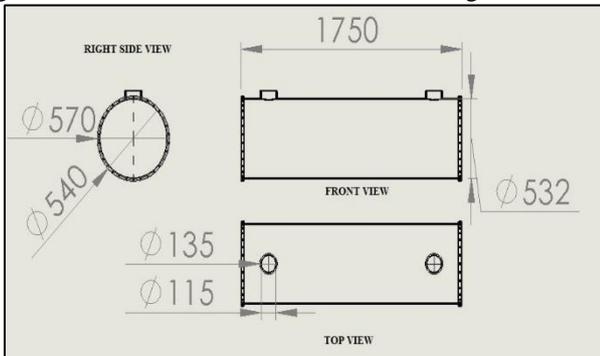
2-D Front view, Top view and Right side view of Shell
